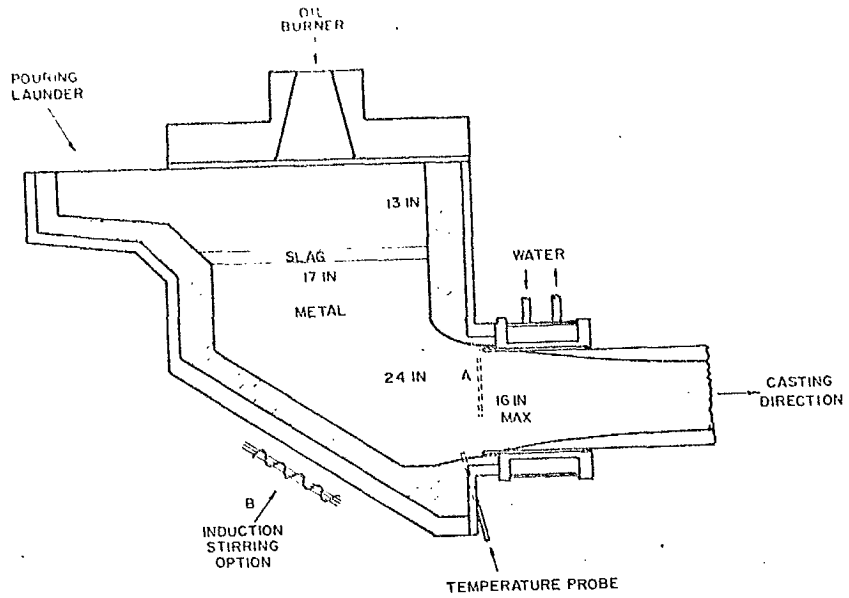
Sketch of tundish and mould assembly. The bath cross-section at the slag-metal line is approximately 17 x 17 in.
